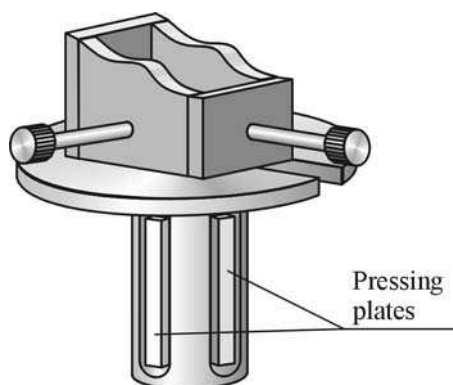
Double plate centring-fixing sub-assembly of the clinometer
